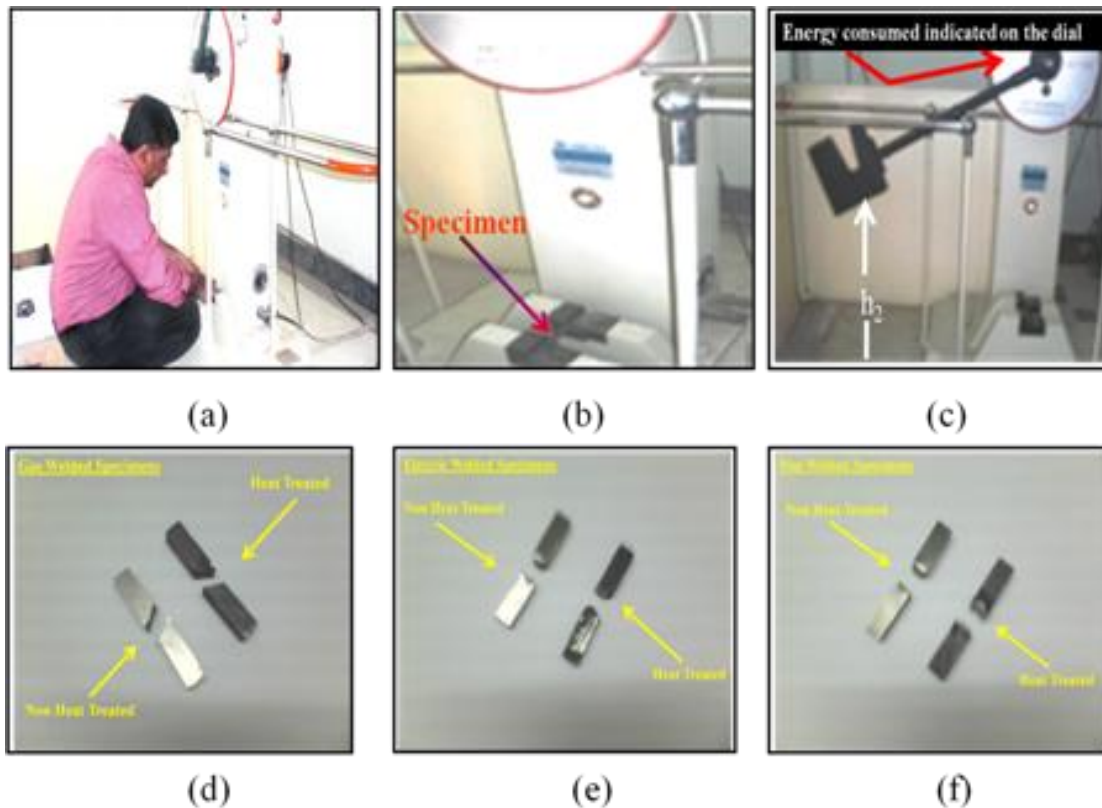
Specimens being tested for fracture toughness in Charpy impact test machine (a,b,c) & Fractured specimens (d,e,f).
